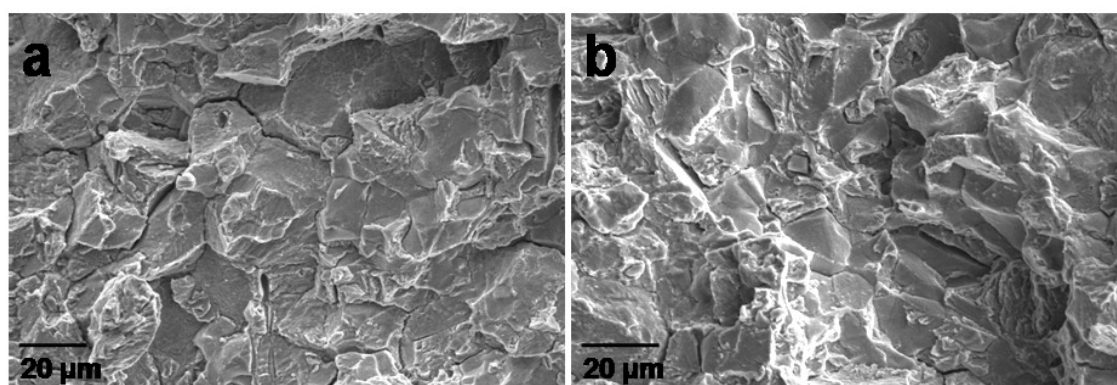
SEM images on the fracture surface showing inter granular mode of cracking
